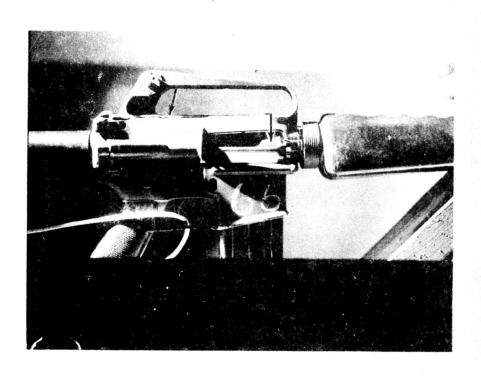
Side view of damaged Fort Huachuca Rifle (Serial No. 598656) showing cracked upper receiver housing.
